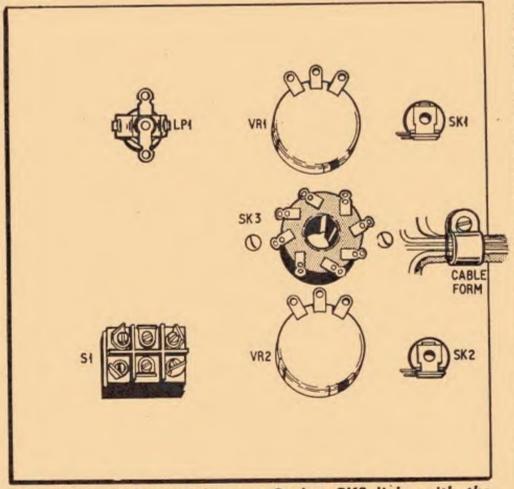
Control panel layout. Socket SK3 links with the remote controls on the guitar. Sockets SKI and SK2 are the signal input jacks
